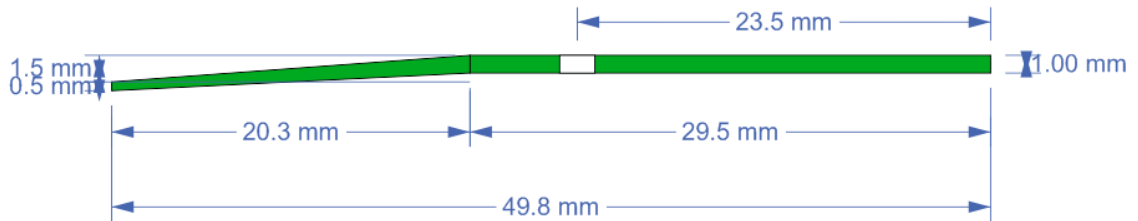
Actual dimensions of a single soft iron pole piece.
